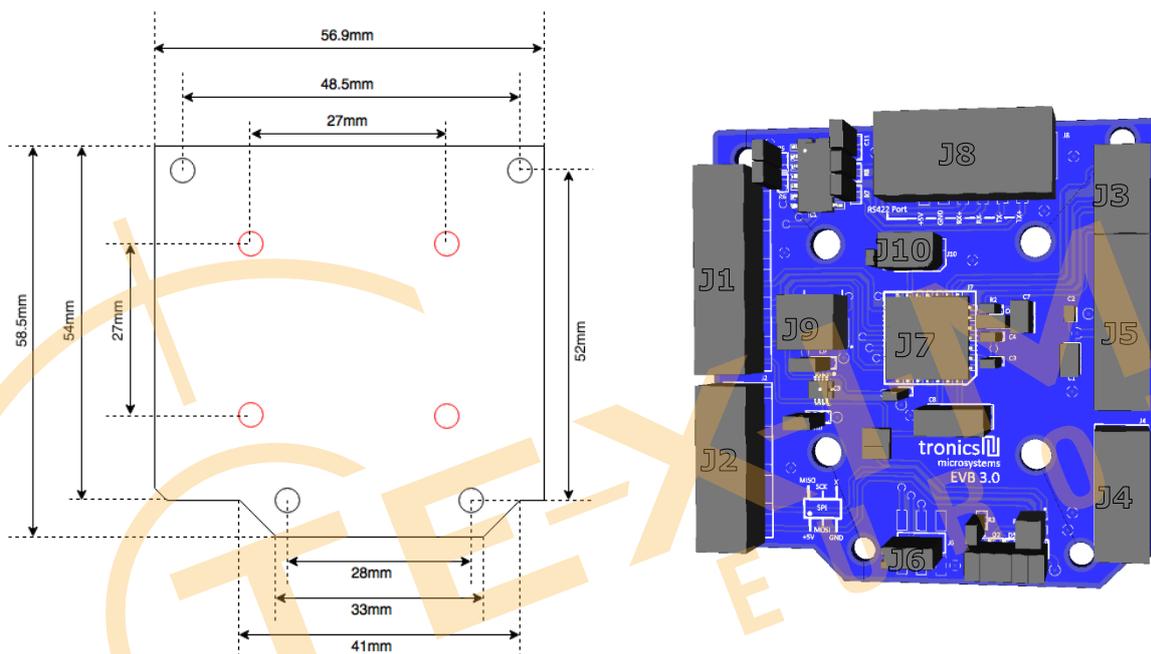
GYPRO®AXO®-EVB3 board (unpopulated) dimensions in millimeters with 3D top view
